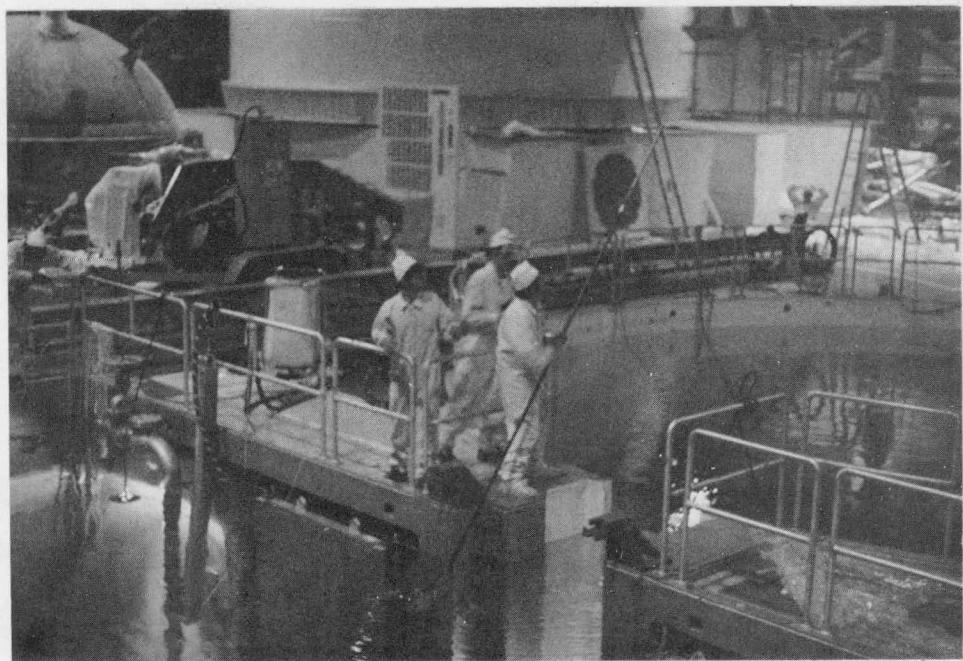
Feedwater Nozzle Clad Removal Machine
